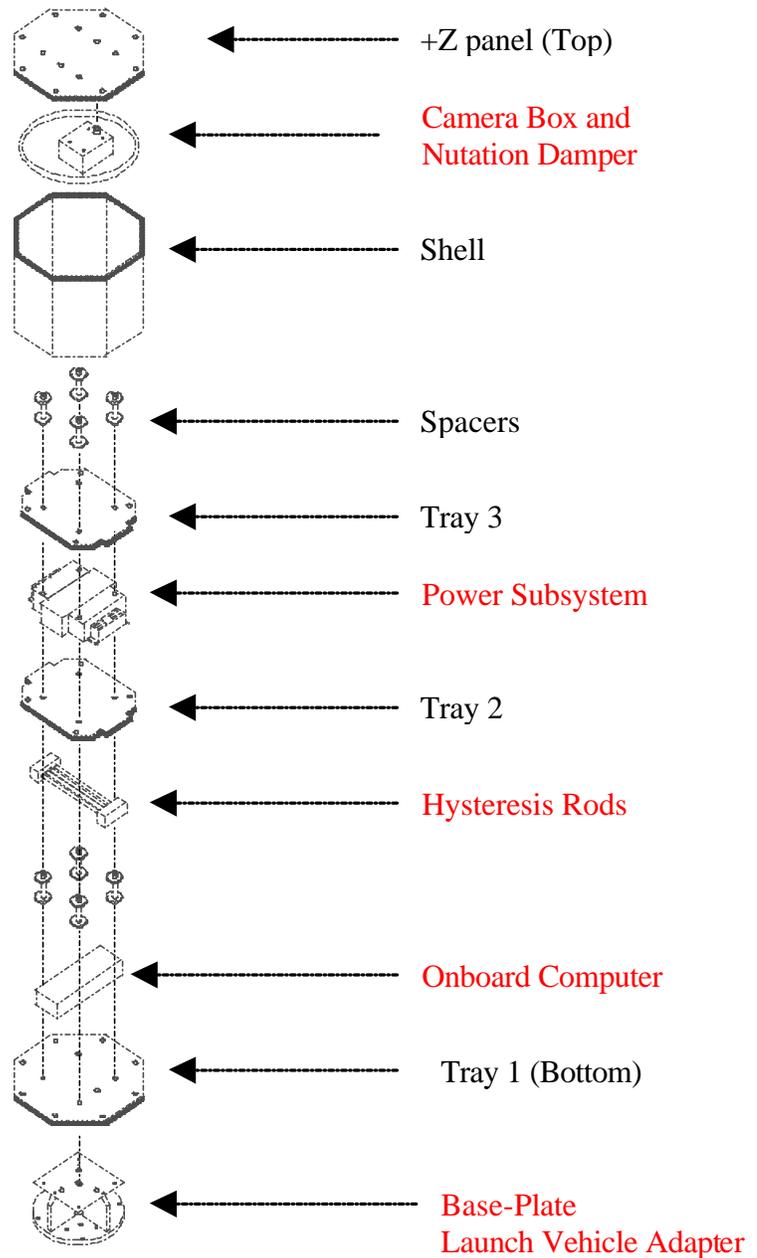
Satellite Exploded View with Launch Vehicle Adapter
